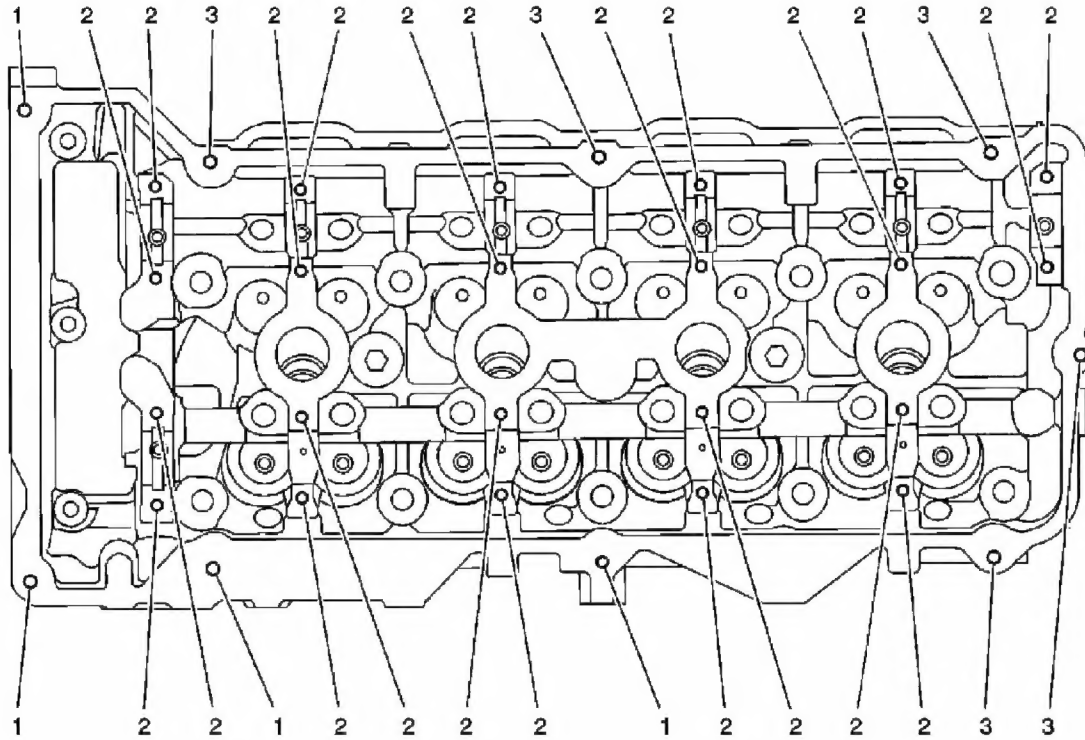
Locating Left Cylinder Head Camshaft Cover Face Specifications
